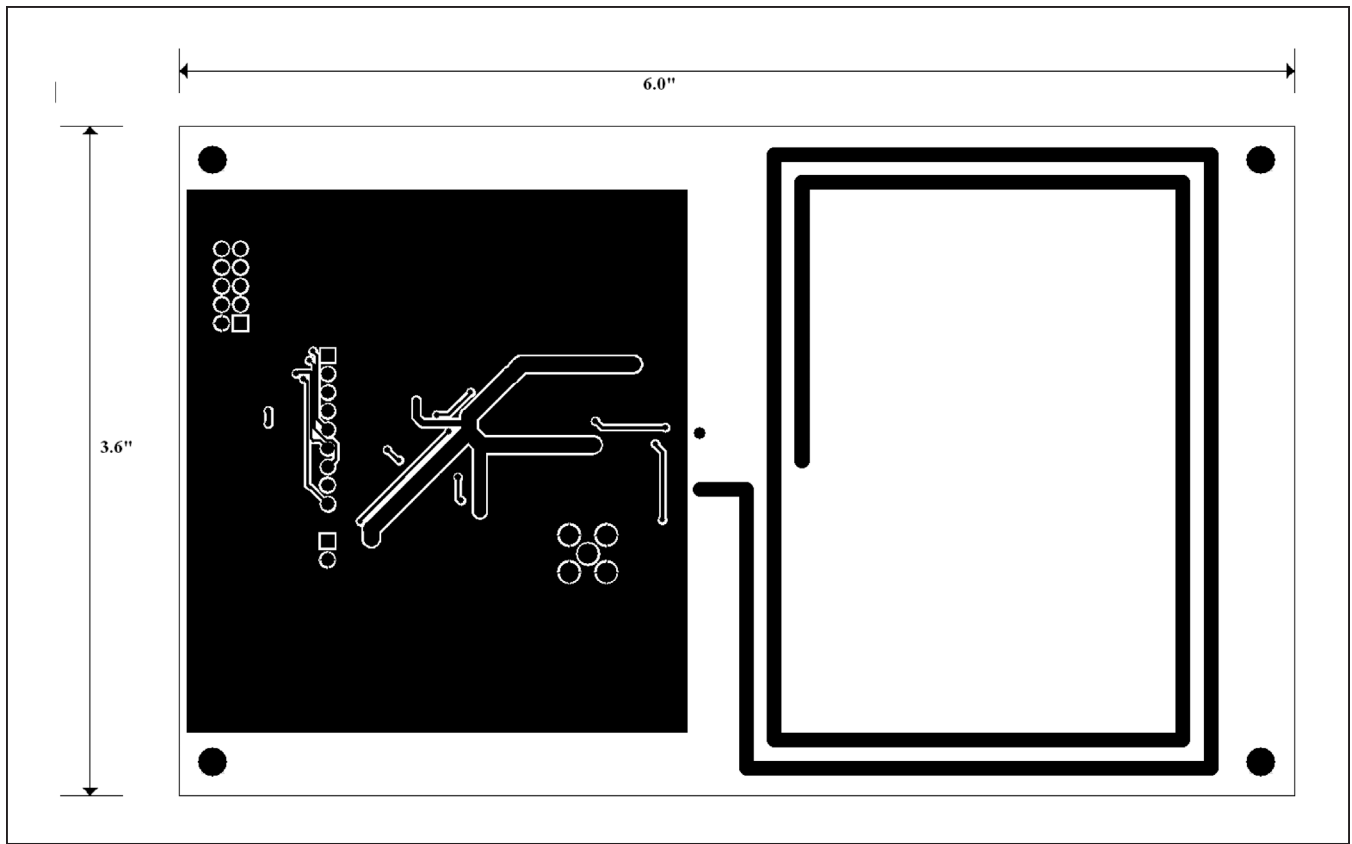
MAX66903 EV Kit PCB Layout—Bottom Copper
